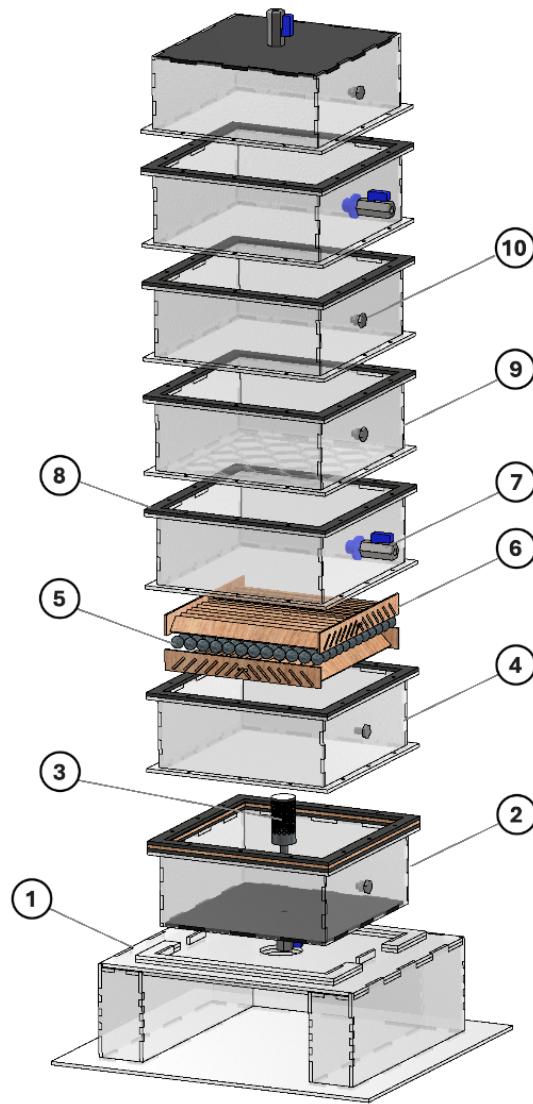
Exploded view of the assembled Permeameter Apparatus showing the specific components of the complete design.
